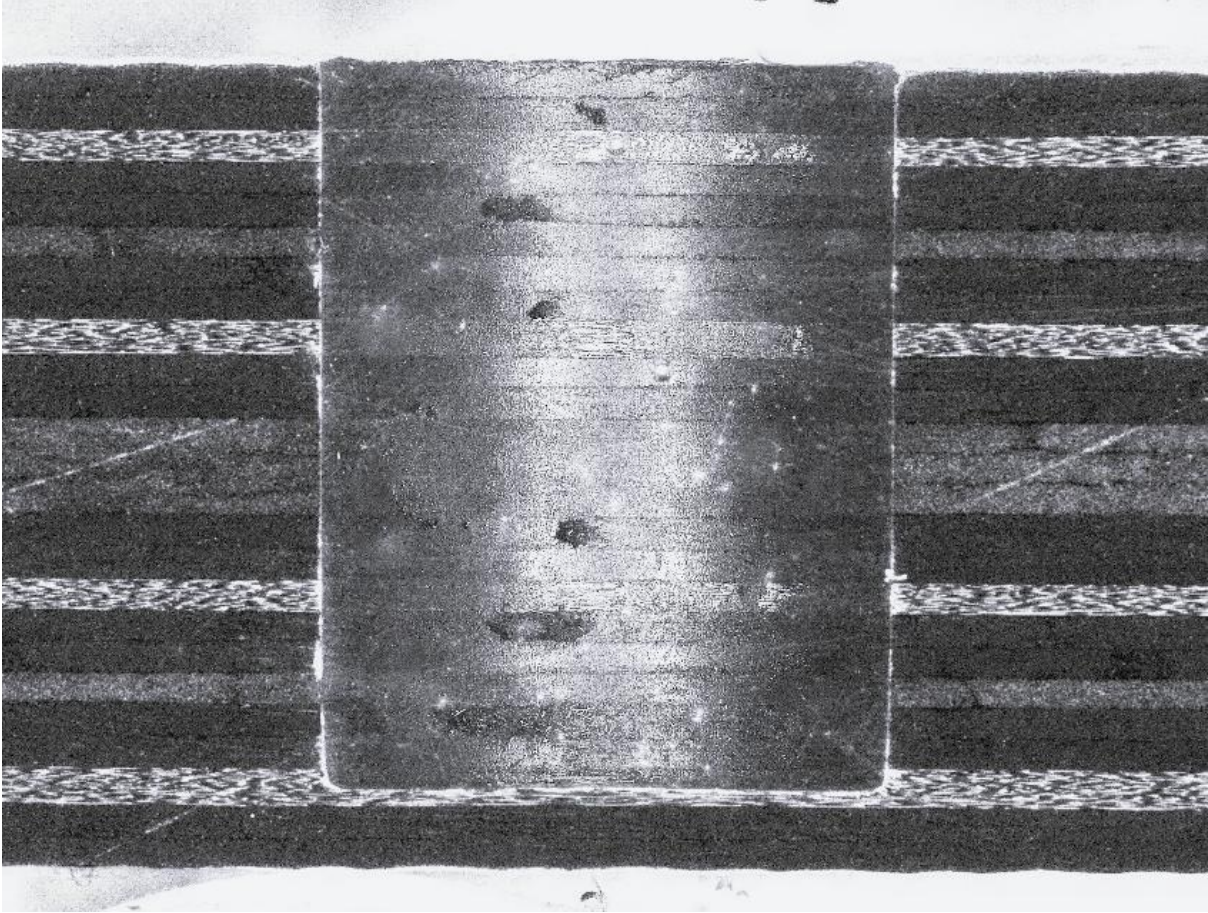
Hole V-01: Drilled hole with vacuum jig of specimen CSAI - RPR - S - 20J - 1.
